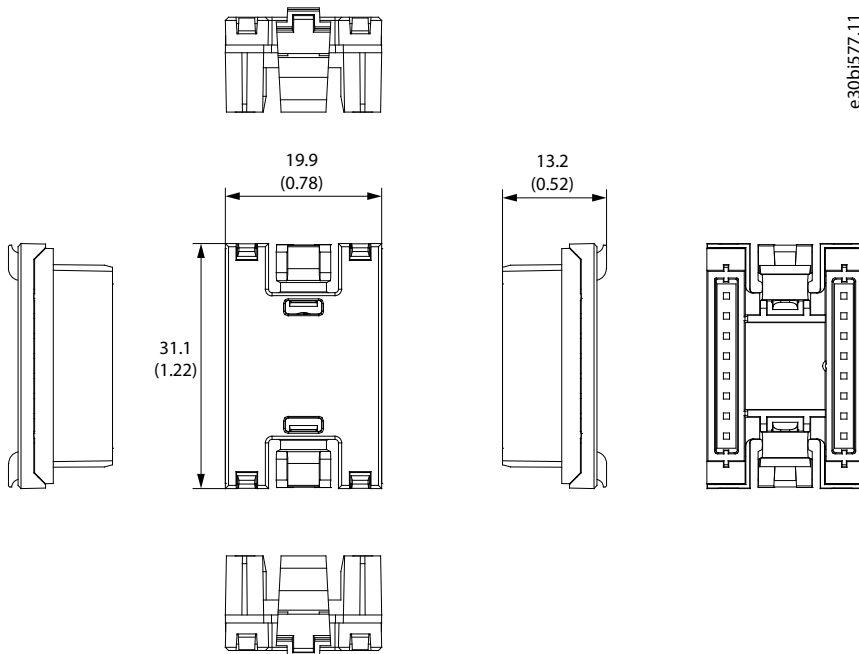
Dimensions of the Modular Control Unit Mounting Plate in mm (in), 2 Places
